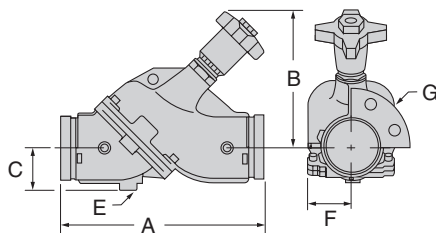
FIGURE GBV-G GROOVED-END STRAIGHT BALANCING VALVES
